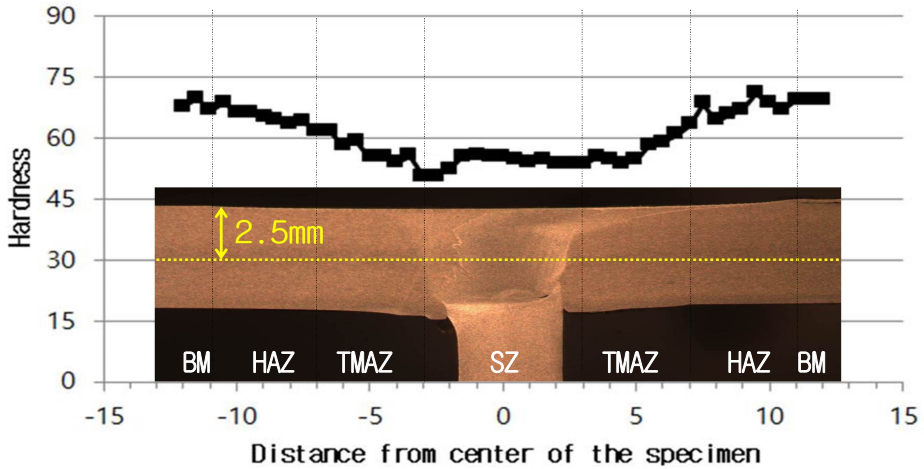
Hardness T-joints fabricated in 500rpm with frustum type
